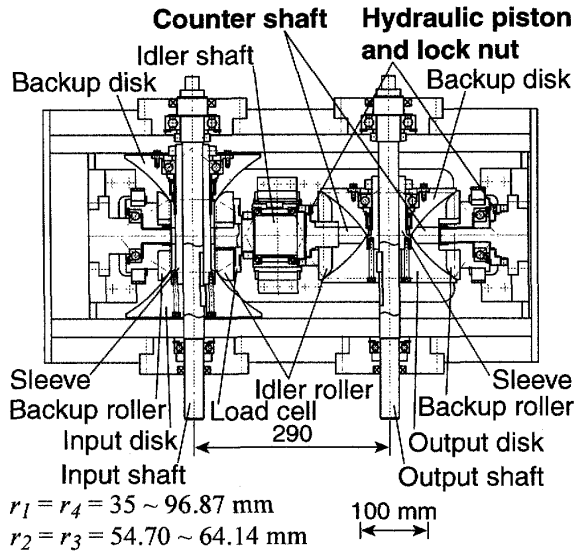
Apparatus of prototype S-CVT equipped with zero-spin disk and counter shaft
